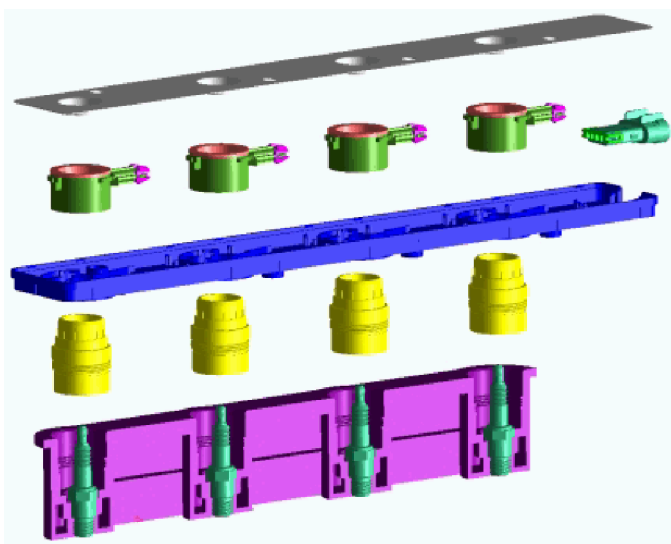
Modular Non-Indexing Connection System Reduces Engine Assembly Costs (exploded view). Design Concept by Delphi Packard Electric Systems.
